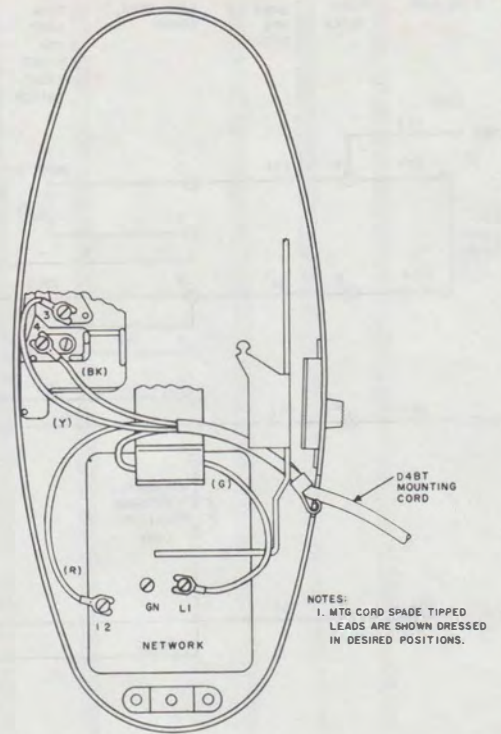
Method of Terminating D4BT Mounting Cords in Sets Equipped With 4228-Type Network
